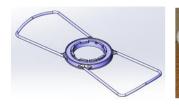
Optional Molded Lifting Handle on Gasket Retainer for 3M™ Zeta Plus™ 12-Inch Filter Cartridges
